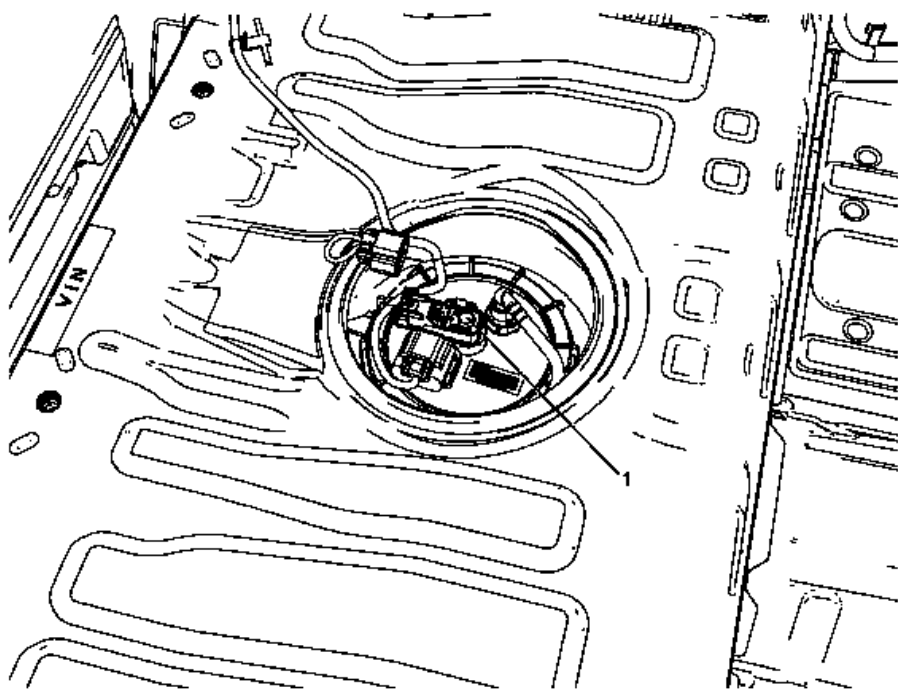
Fuel Tank Pressure Sensor (LFM)
